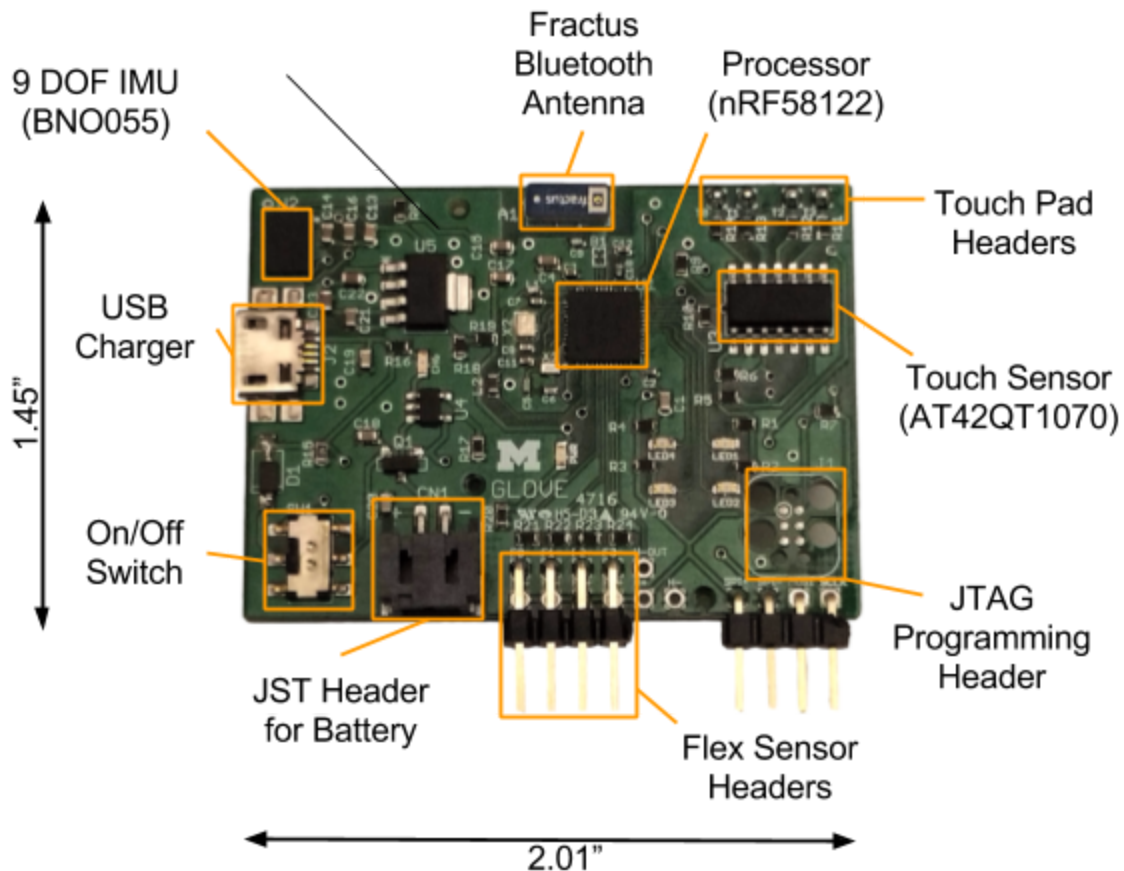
Layout of the major components on the PCB, including the processor and sensors
